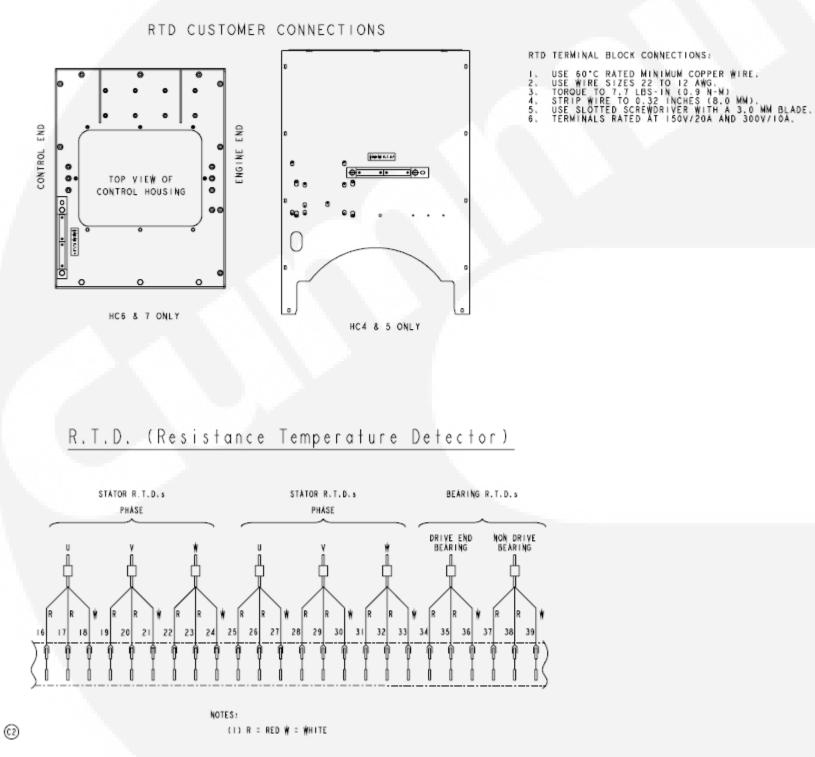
CUSTOMER CONNECTIONS DRAWING - 620-0247 SHEET 2
